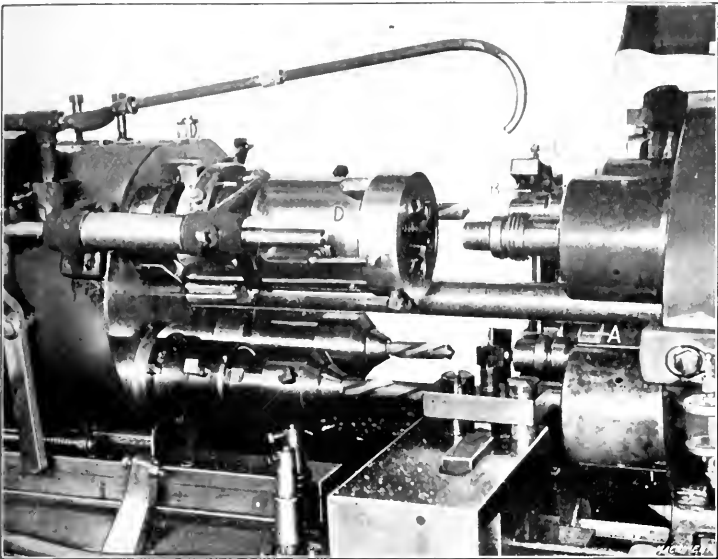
Tooling "Set-up" used in producing the Steel Part shown in Fig. 6
